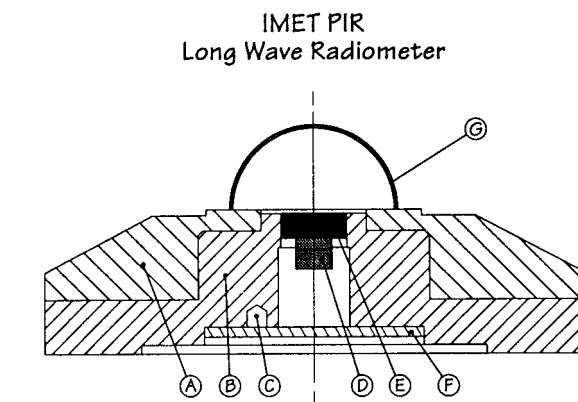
Cross-section sketch of IMET PIR. Significant parts and materials are (a) radiation shield and mount (white-painted aluminum), (b) body (aluminum), (c) hole into which body thermistor is potted, (d) thermopile, (e) thermopile cap containing flat black-coated flux-sensitive surface, (f) internal radiation shield, and (g) silicon dome.
